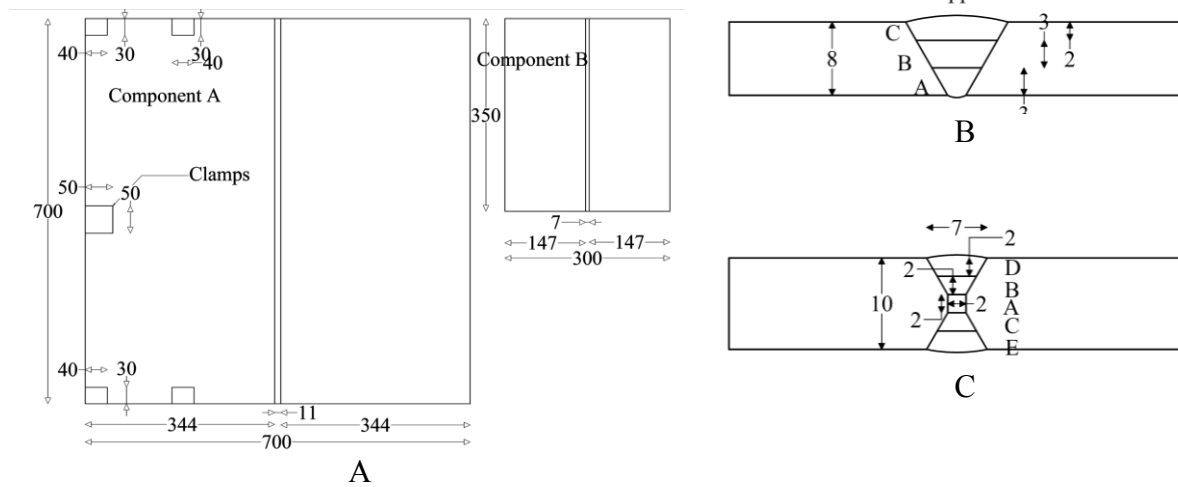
Investigated components – A: Plate dimensions for model A (left) model B (right) B: weld section of component A – C: weld section of component B
